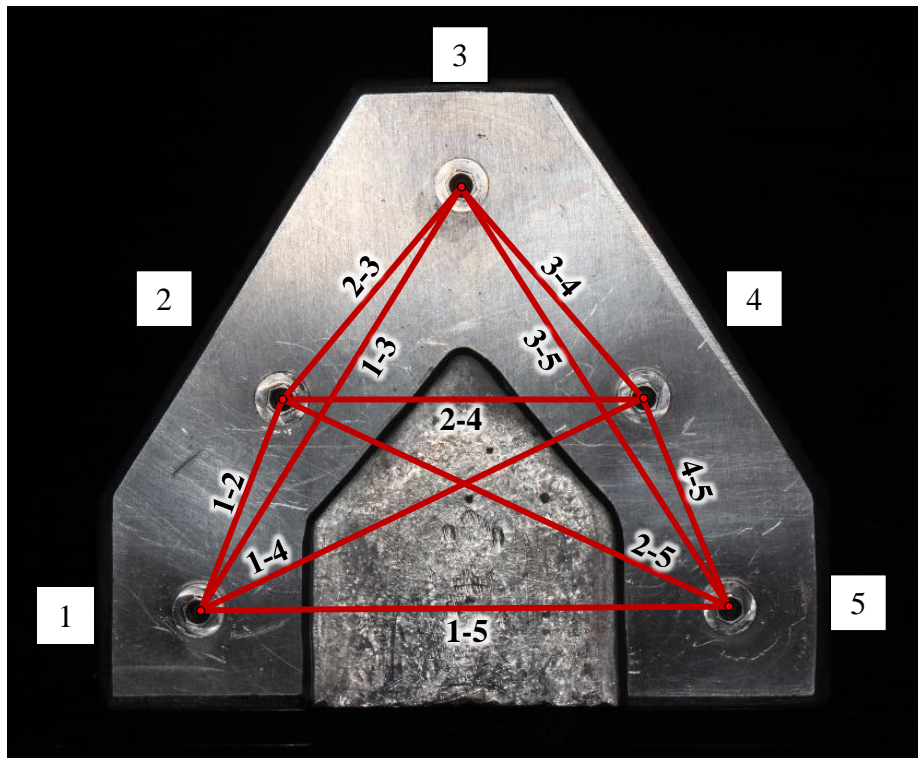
Milled frameworks in aluminium blanks (ASTM B348, Acnis, Villeurbanne, France)
